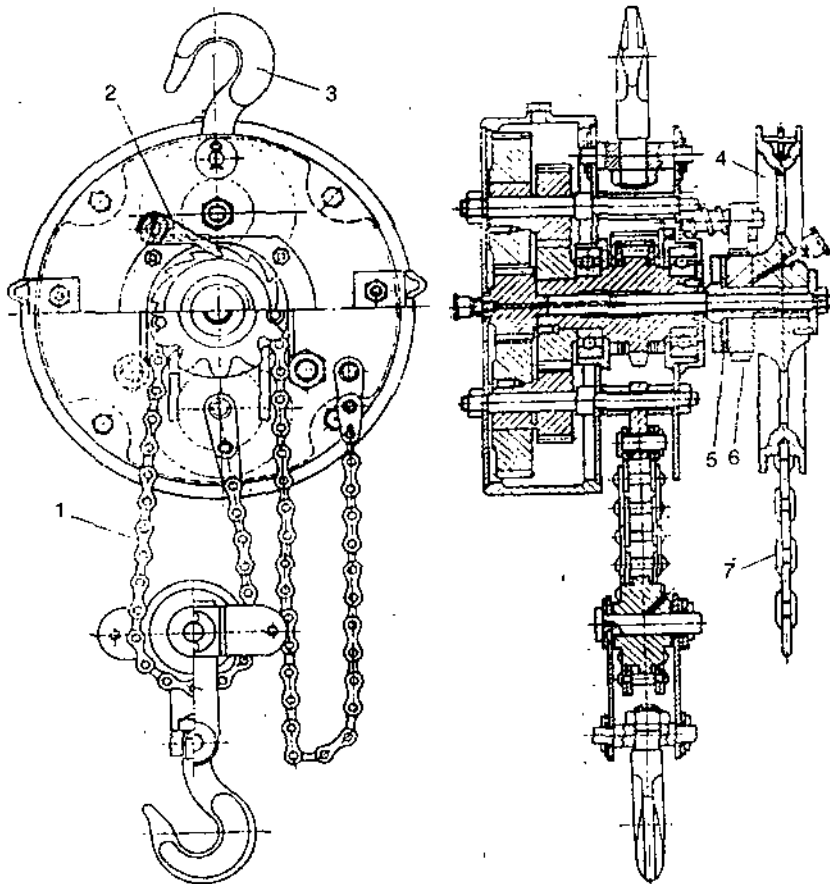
Hand powered hoist with coaxial gear drive.
